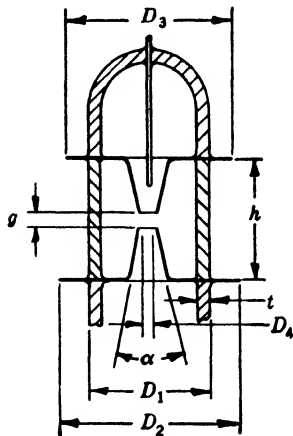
Critical dimensions of 721B, 724B, and 1B27 tubes given in Table 2-4.
